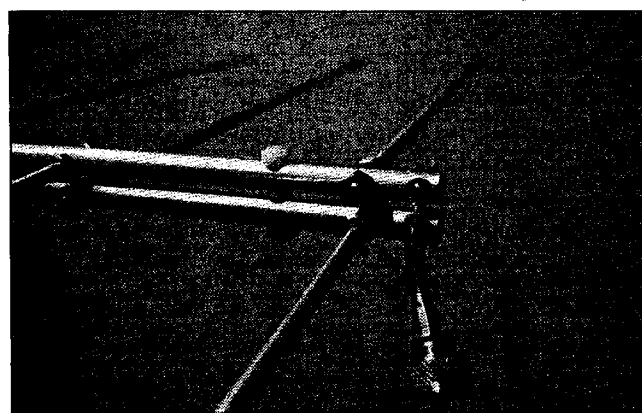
Photo C. Detail of the boom, element assembly and feedpoint attachment.
